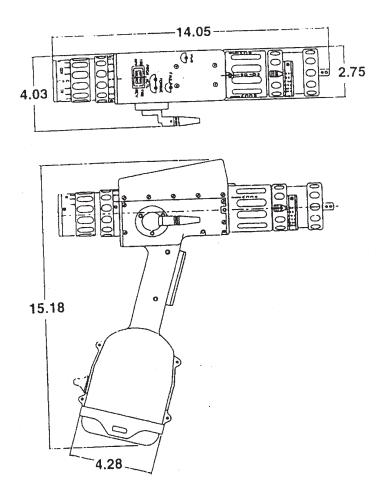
PISTOL GRIP TOOL ENVELOPE
